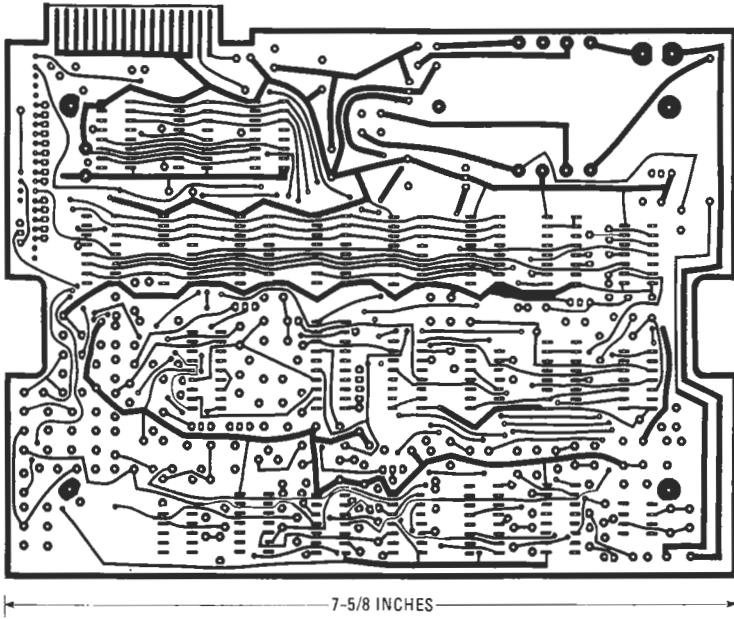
THE SOLDER SIDE of board A is shown here, also at half its actual size.
